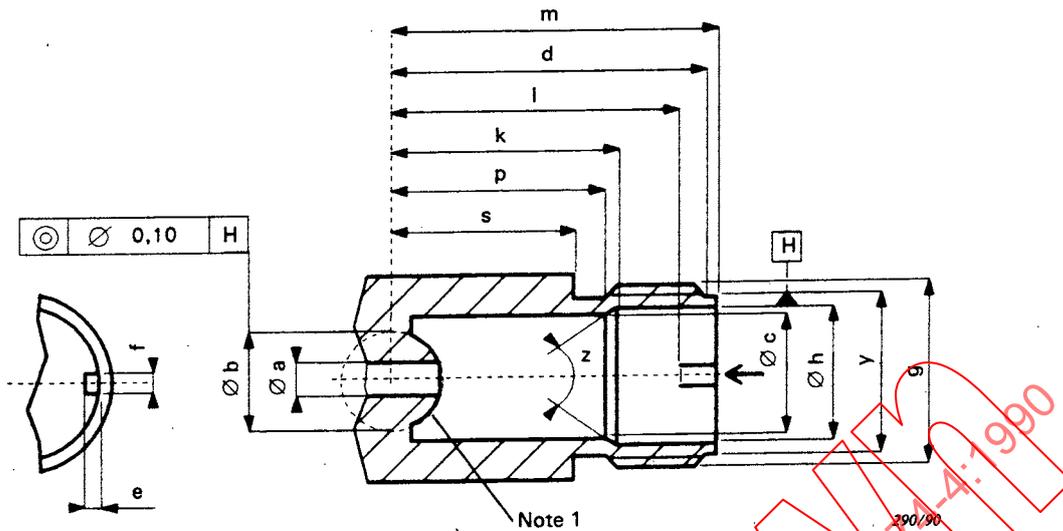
Adaptor interface drawing (for dimensions and note see table 2)
